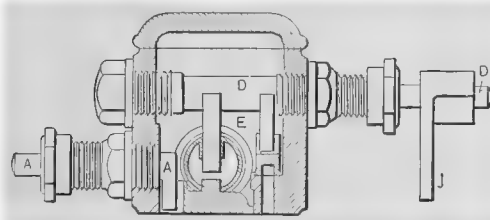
Auxiliary valve, Guild & Garrison pump.
